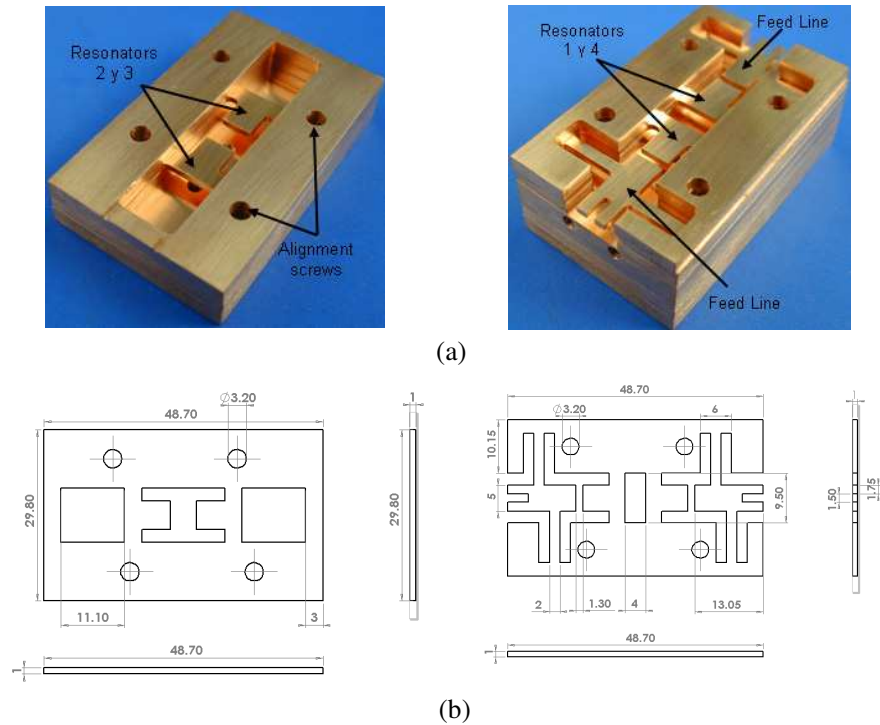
Quasi elliptic filter. (a) Open view photographs of the quasi-elliptic filter. (b) Technical drawings of layers 3 and 7 of the quasi-elliptic filter (dimensions in millimeters).
